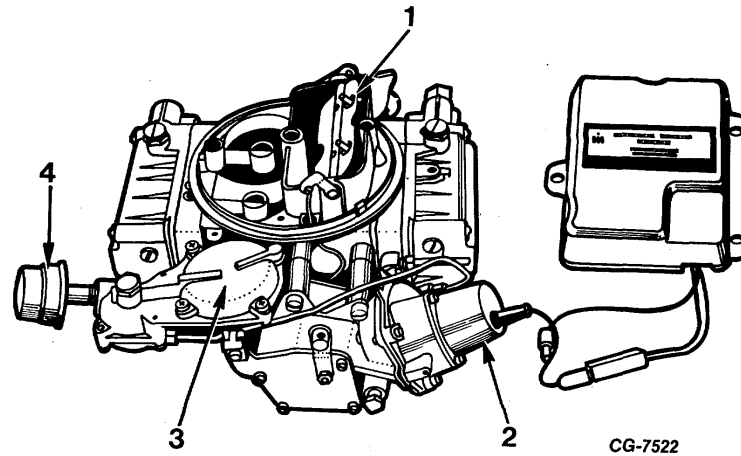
Model 4150EG Carburetor with Electronic Vacuum Modulating Type Governor
